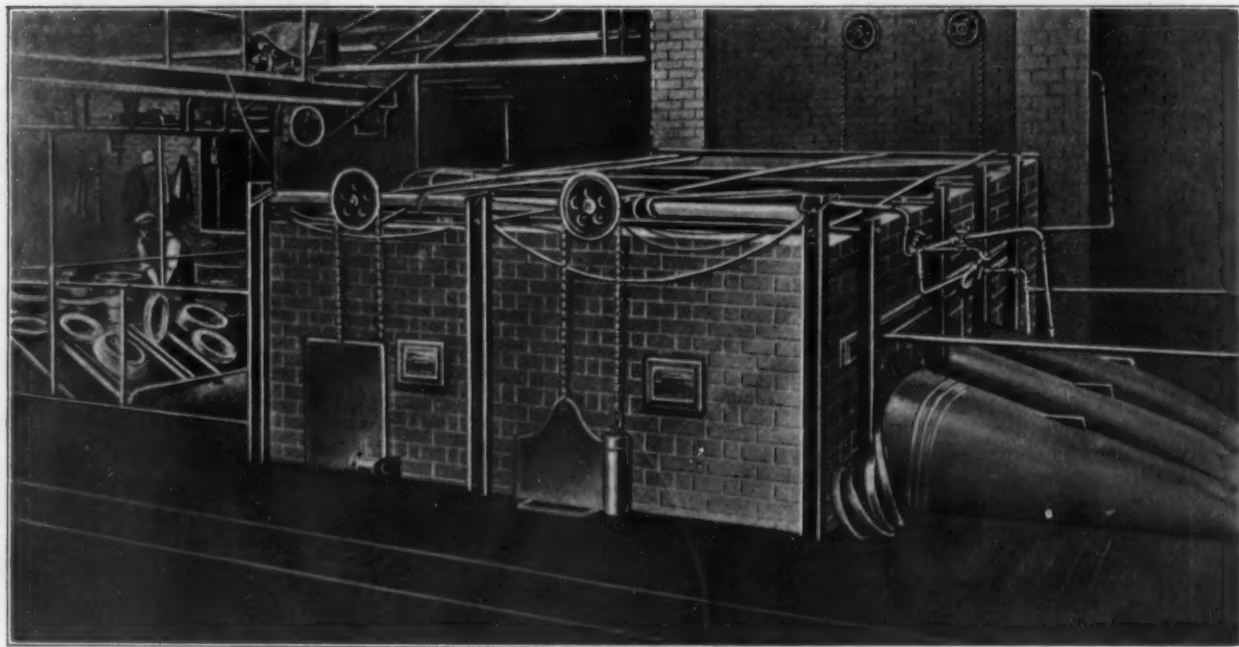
Body Portion of Three-Tube Wire Annealing Machine.
